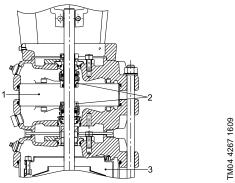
CR 32 to 90 with back-to-back seal arrangement
